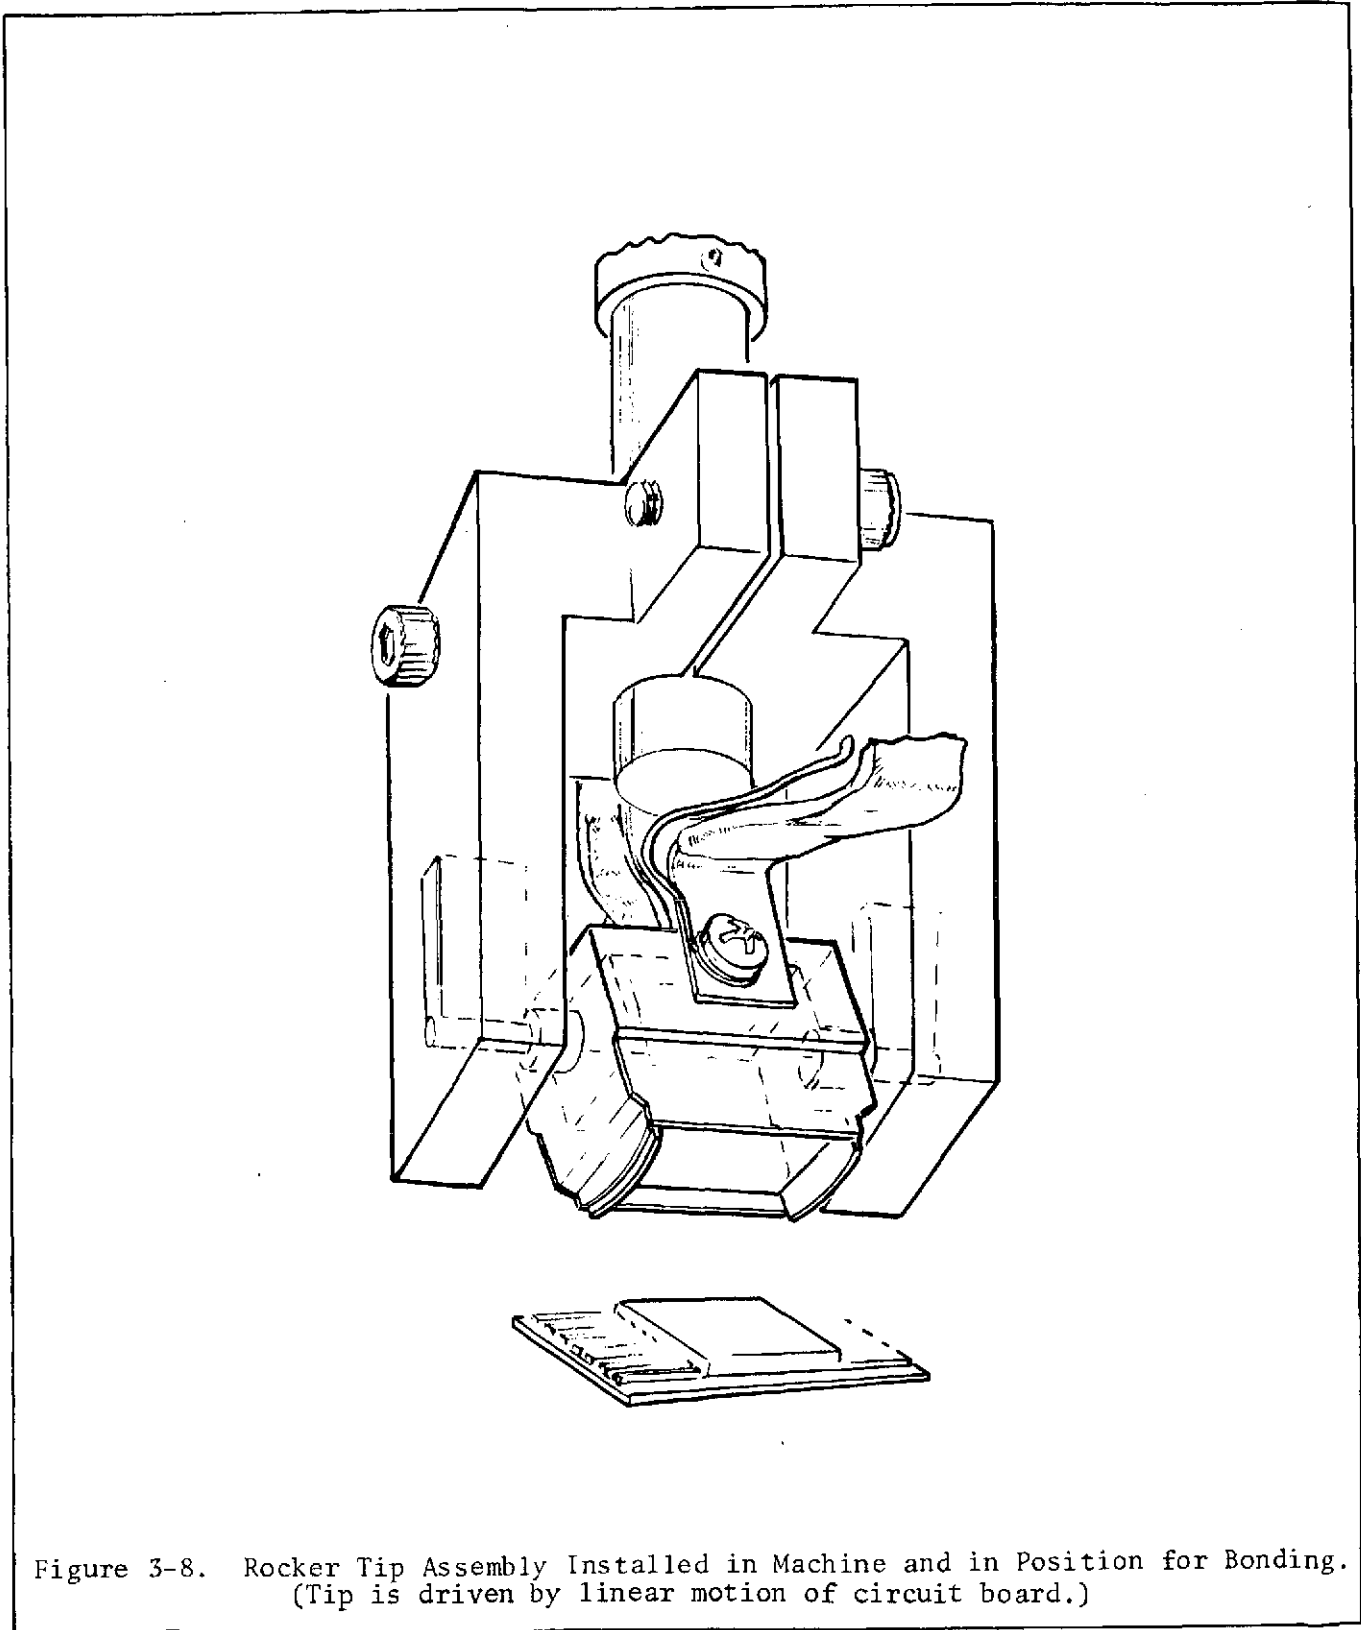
Rocker Tip Assembly Installed in Machine and in Position for Bonding.
